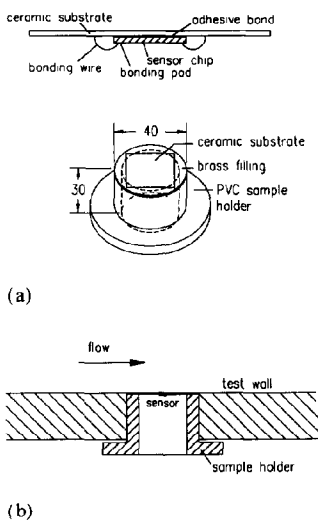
Sensor assembly, not to scale (a) mounting of the chip to the carrier substrate and assembly of the sample holder, dimensions are in mm, (b) cross section of the sample holder in the flow set-up
